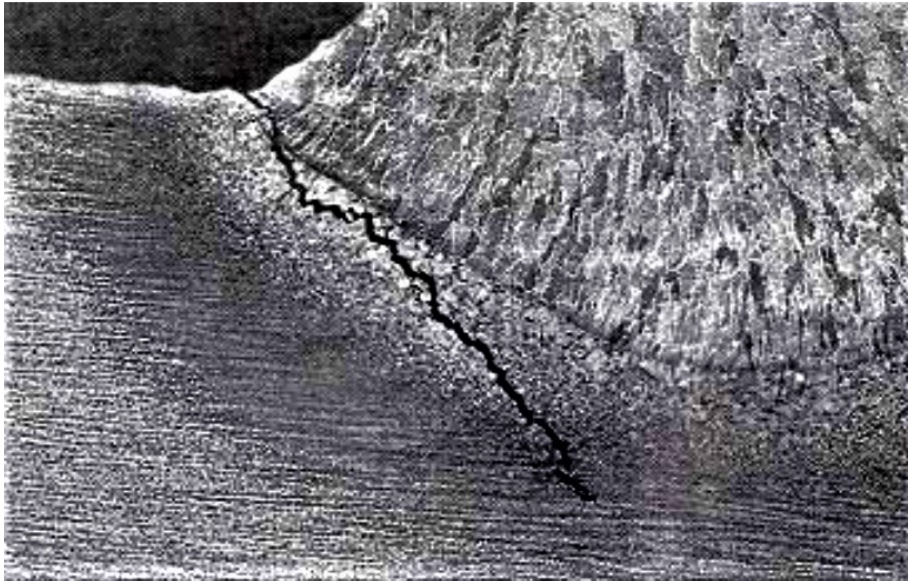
SOHIC indication in a fillet weld HAZ. (Hydrogen cracking. 2022.)
